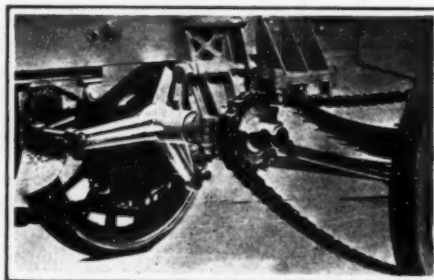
Countershaft End with Ball and Socket Bearing, Also Rear Spring Slide.
